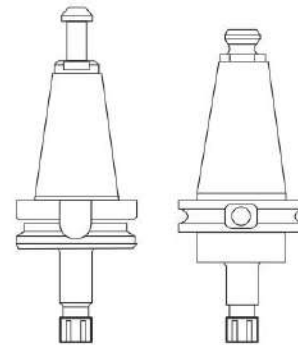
Adopter shapes for (a) BT style; (b) ANSI CAT-V style for CNC machining centres
